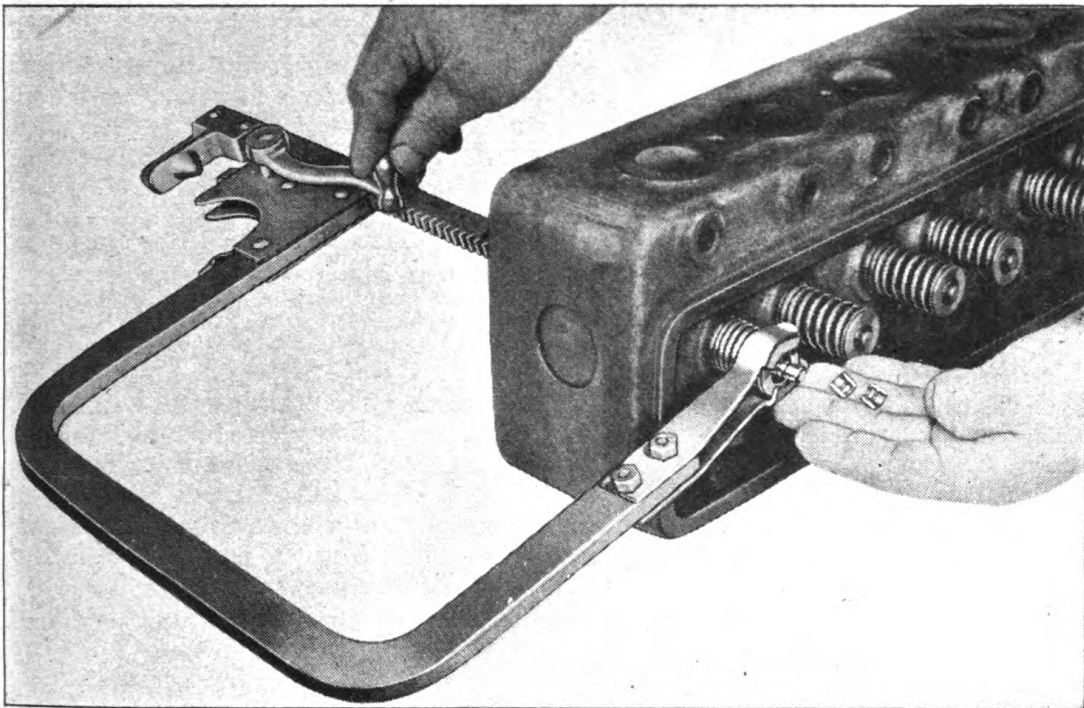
Removing Valve Retainers Using Owatonna Tool Company's Valve Lifter No. A200. Other Standard Tools will do as well.
